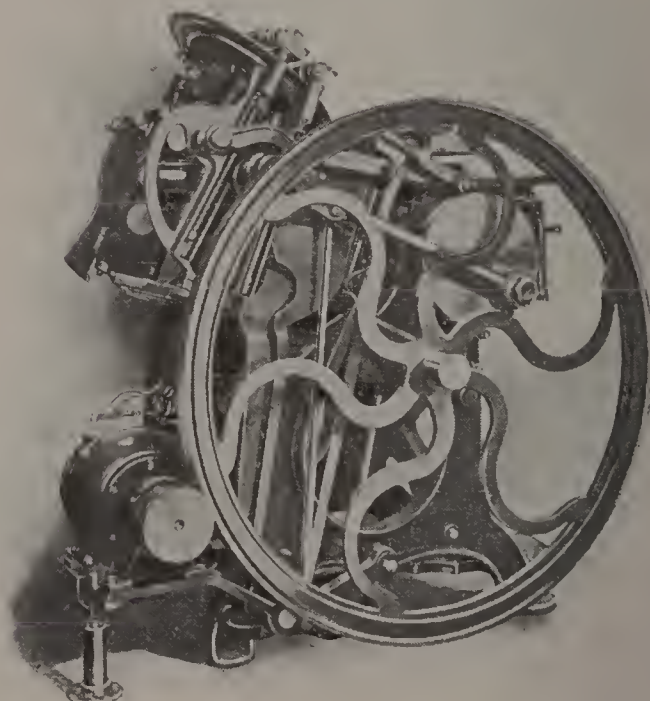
SPRAGUE ROUND TYPE MOTOR, OPERATING JOB PRESS BY FRICTION DRIVE.
